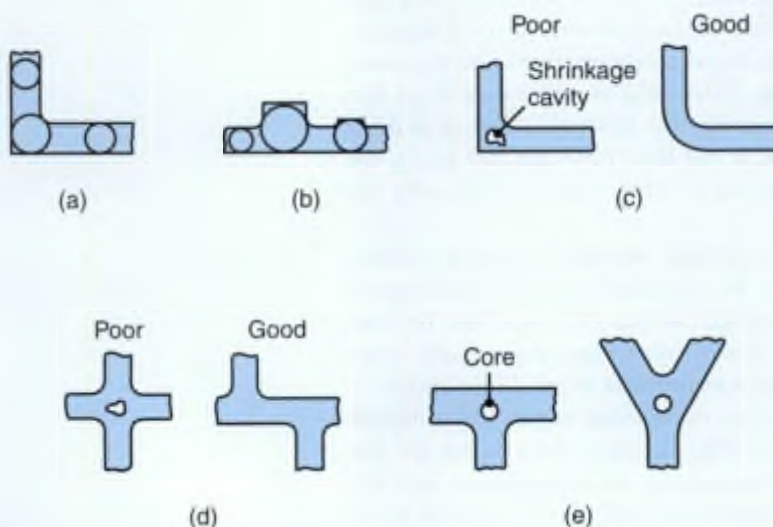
Examples of designs showing the importance of maintaining uniform cross-sections in castings to avoid hot spots and shrinkage cavities.
